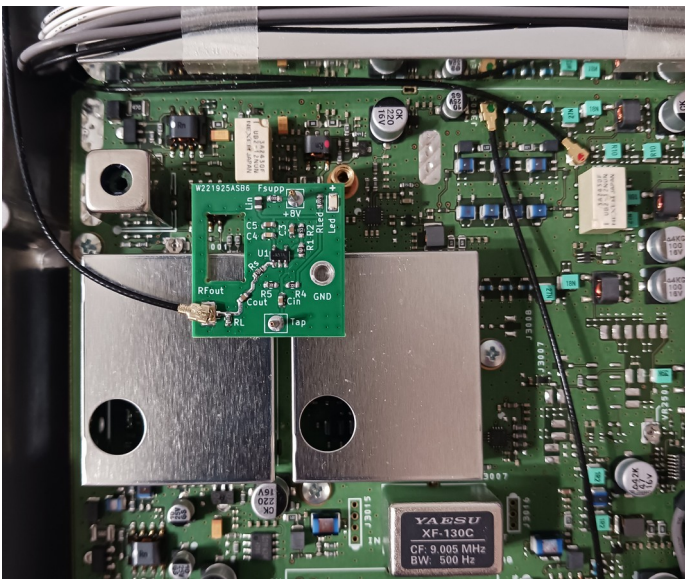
U.FL-SMA cable attachment to FTRX-10.
